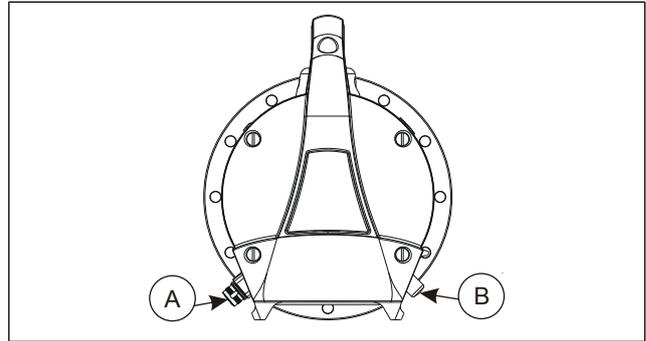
Metso rotating consistency transmitter, rear view: A. motor cable connector, B. TCU cable connector
